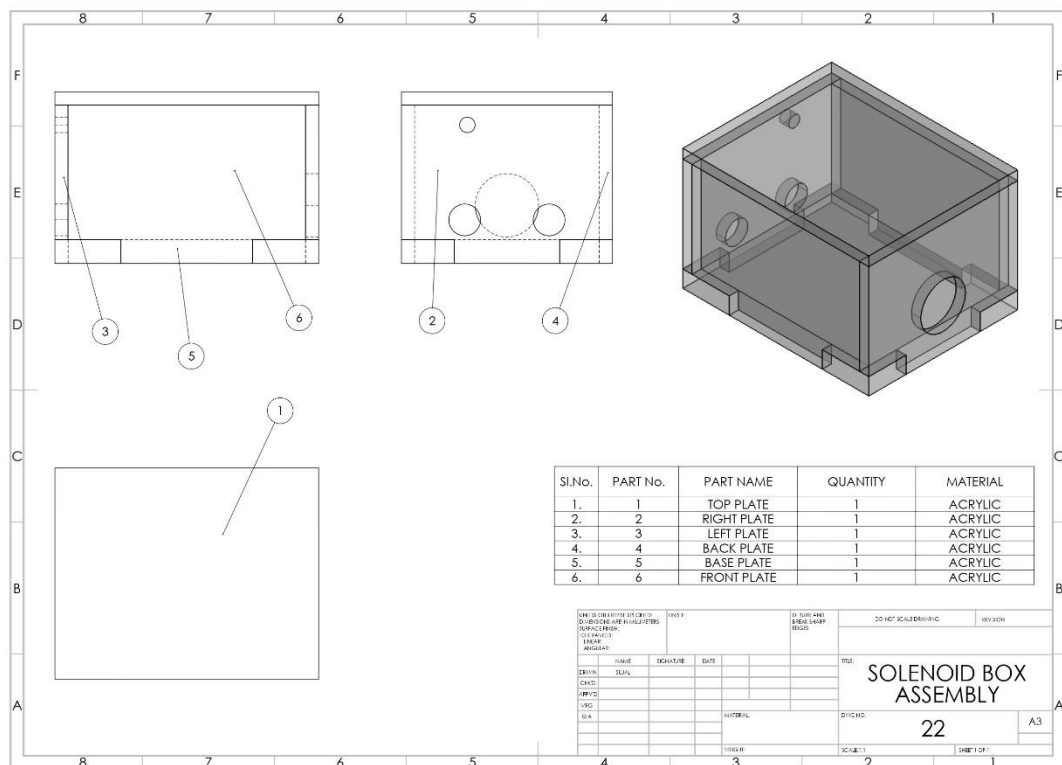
Drafting of Assembly of Solenoid Box
